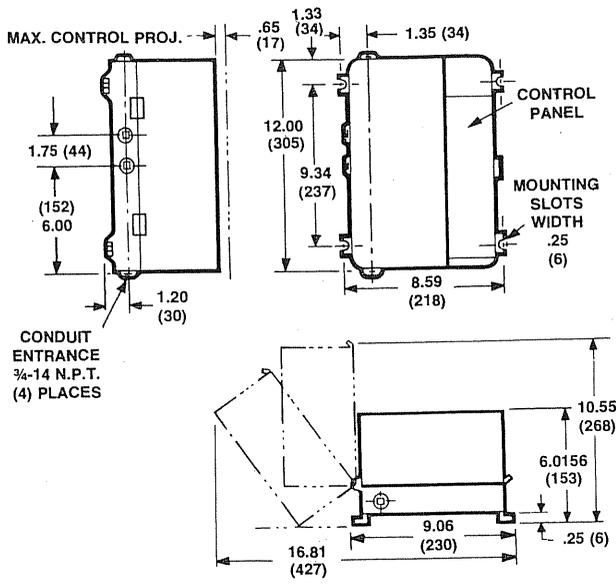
SERIES 2400 MKII DIMENSIONS
